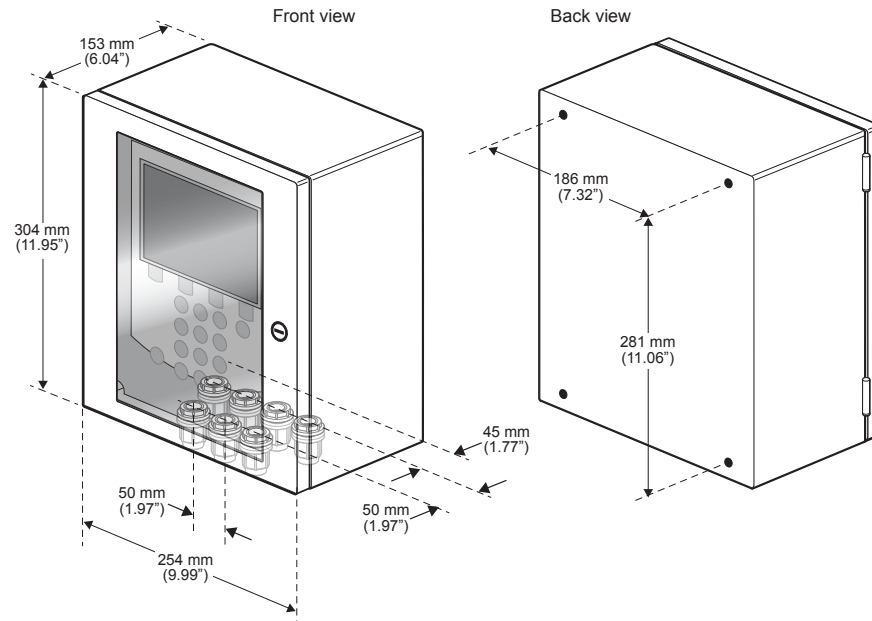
Indicating Transmitter DTR-GP-SC with Stainless steel enclosure; dimensions (mm/in).
